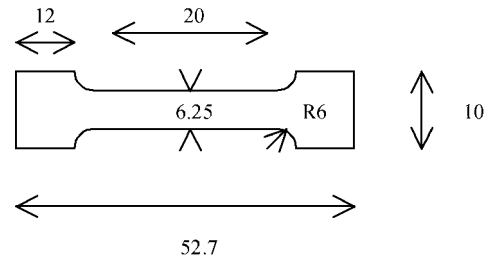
Tensile specimen with dimensions in mm (thickness: 1.3 mm).
